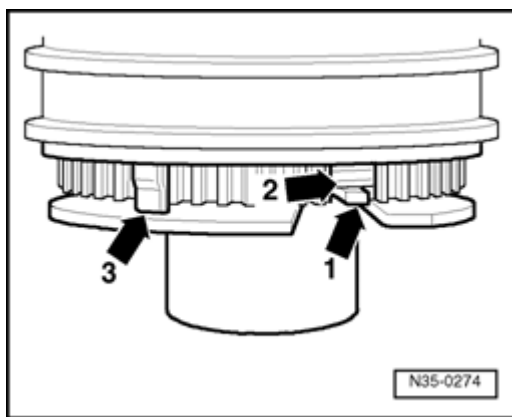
Positioning spacer sleeve toward 5th gear locking collar/synchro-hub
